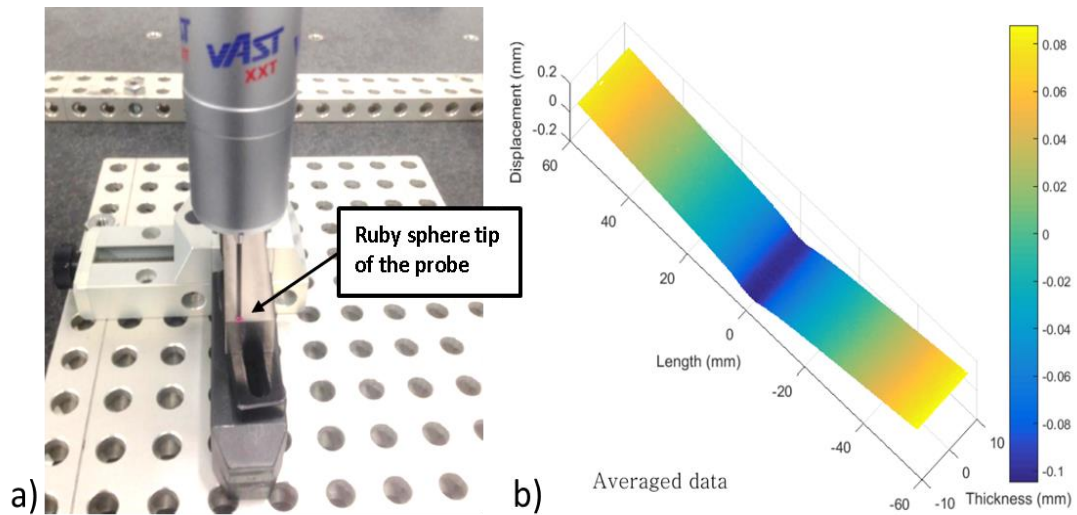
a) CMM machine and b) Displacement profile of weld 1 measured by the CMM machine
